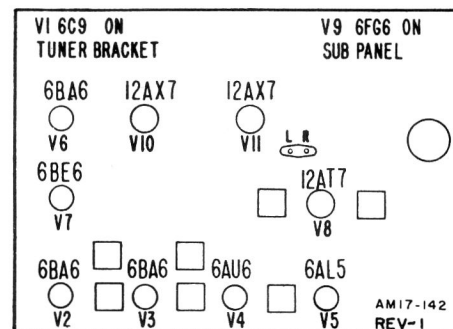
Tube Layout J103X Tuner and Amplifier Chassis
